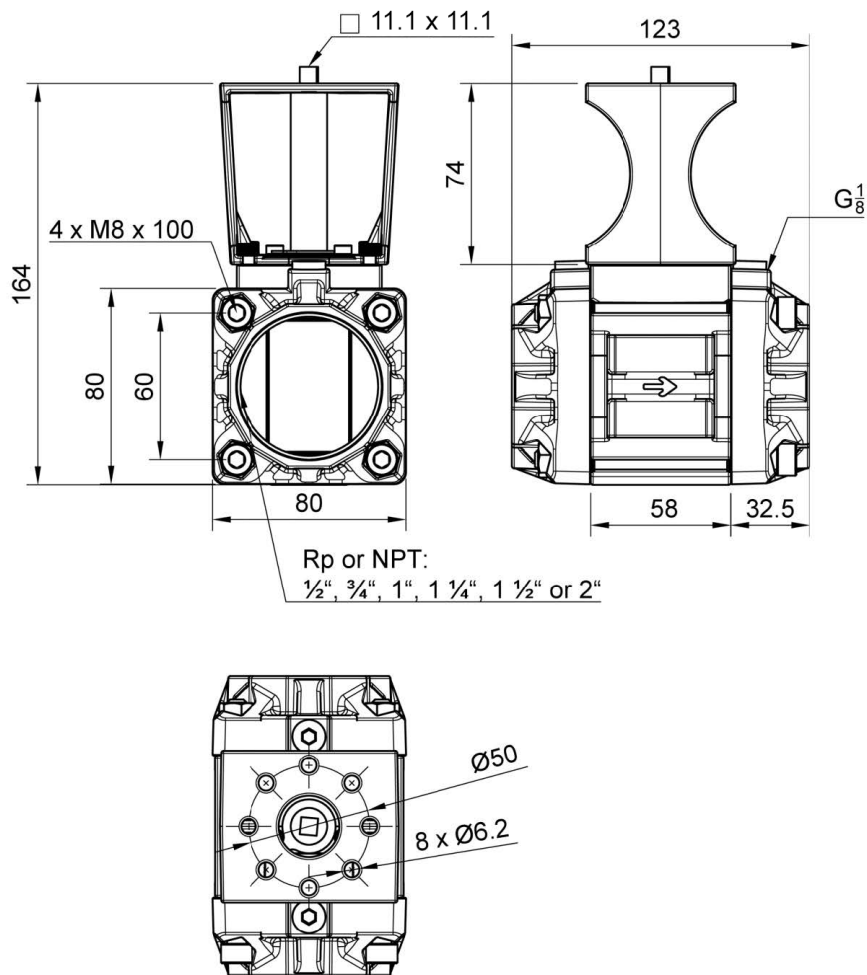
Dimensional drawing gas control valve type SVL – 668M2400 (dimensions in mm)
